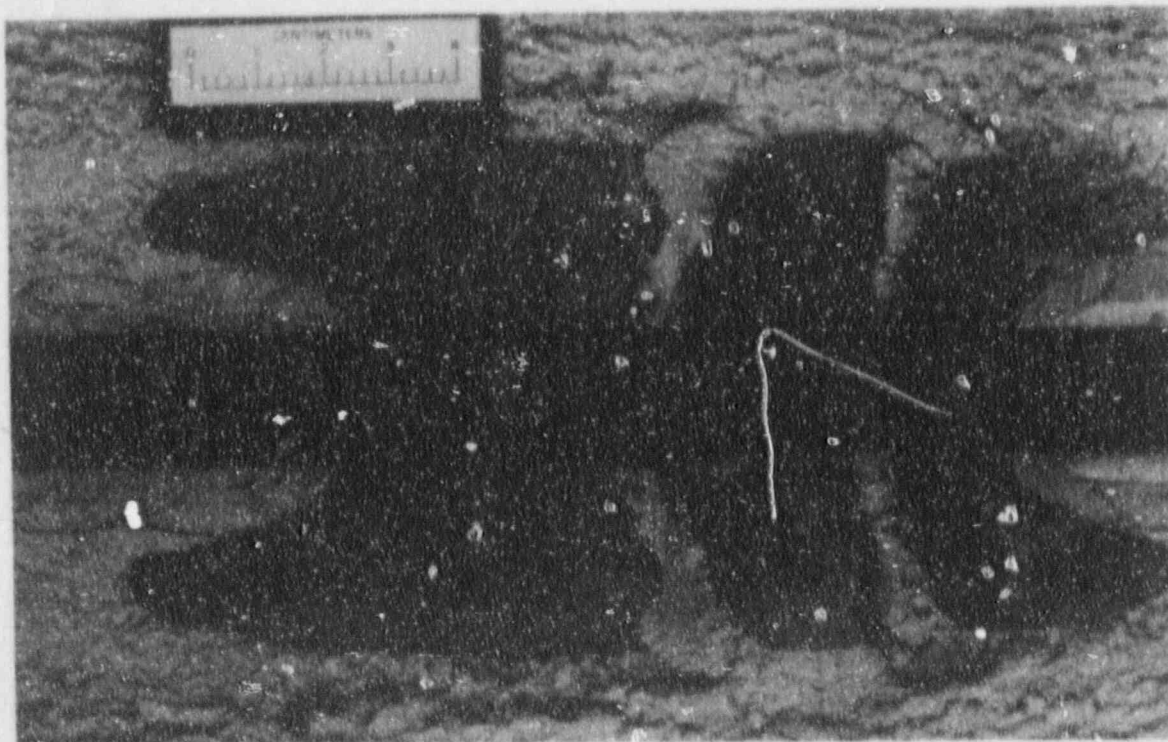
Closeup of the fracture surface from clad plate CP-17 showing the scalloped shape of the HAZ resulting from each weld pass.
